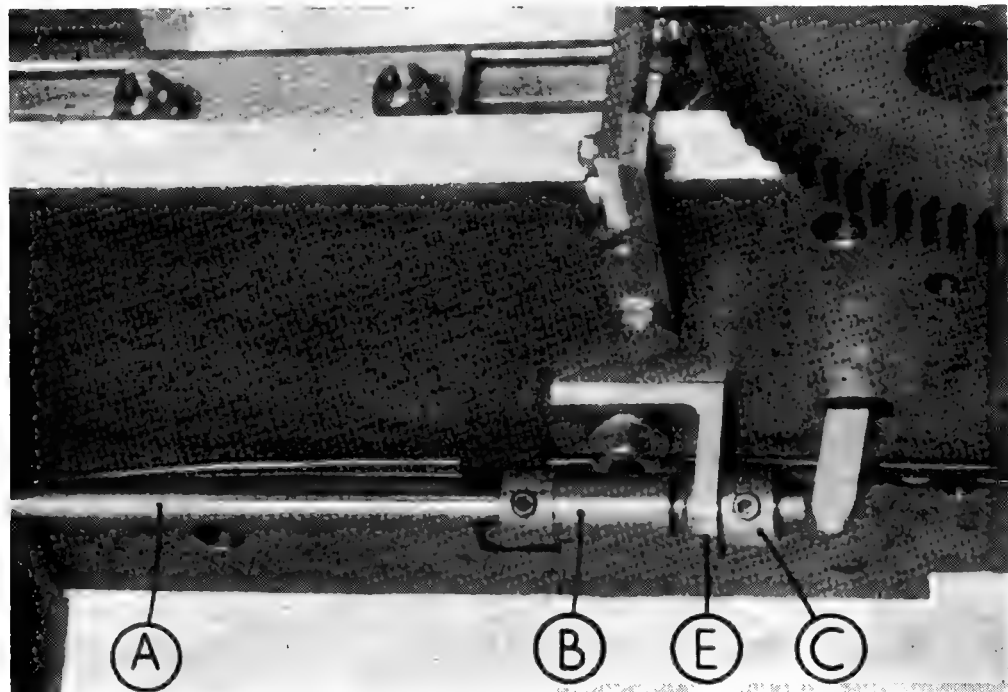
The reset mechanism. (A) the control-rod; (B) the spring-loaded forward stop; (C) the back-stop; (E) the bearing bracket
